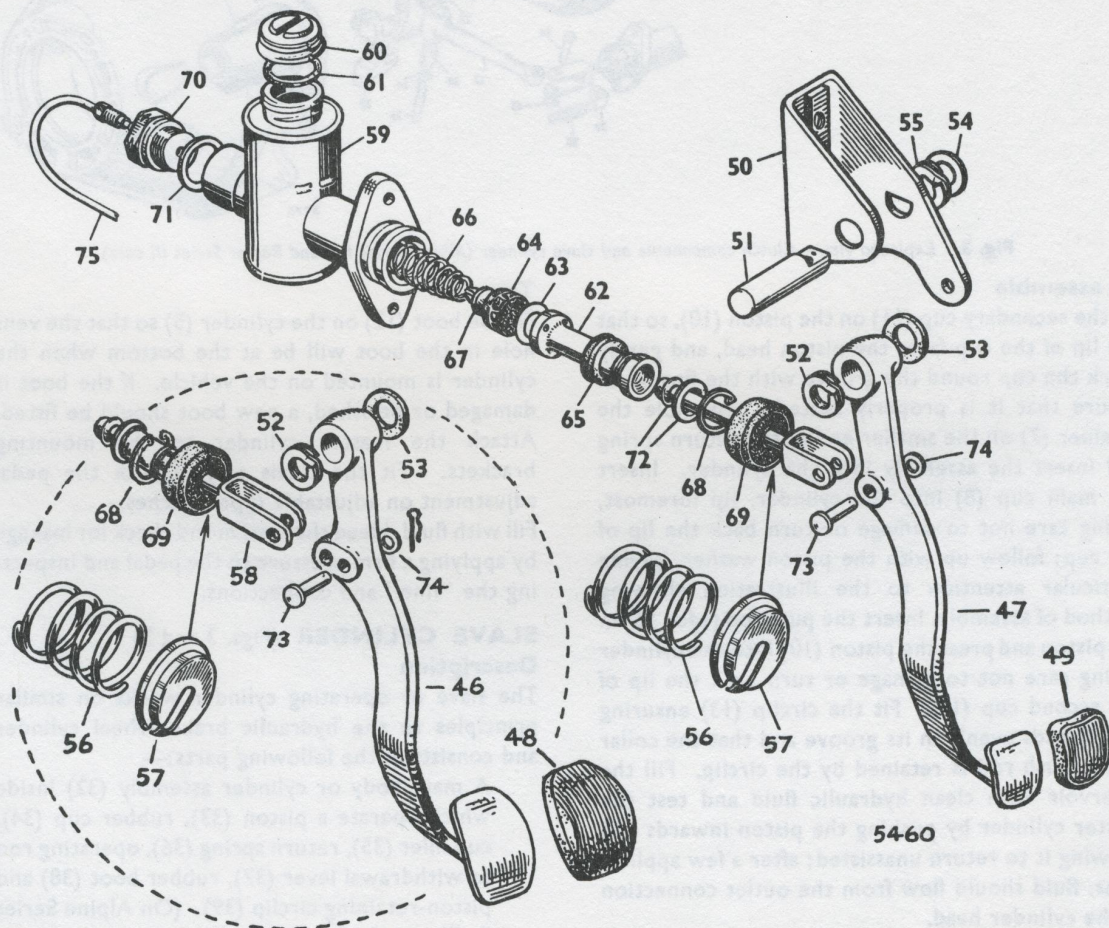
Exploded view—Master cylinder and pedal linkages (Inset Alpine Series II and III cars)
